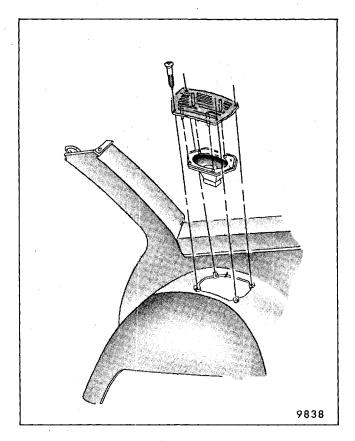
Rear Speaker Installation - A-35 Styles
